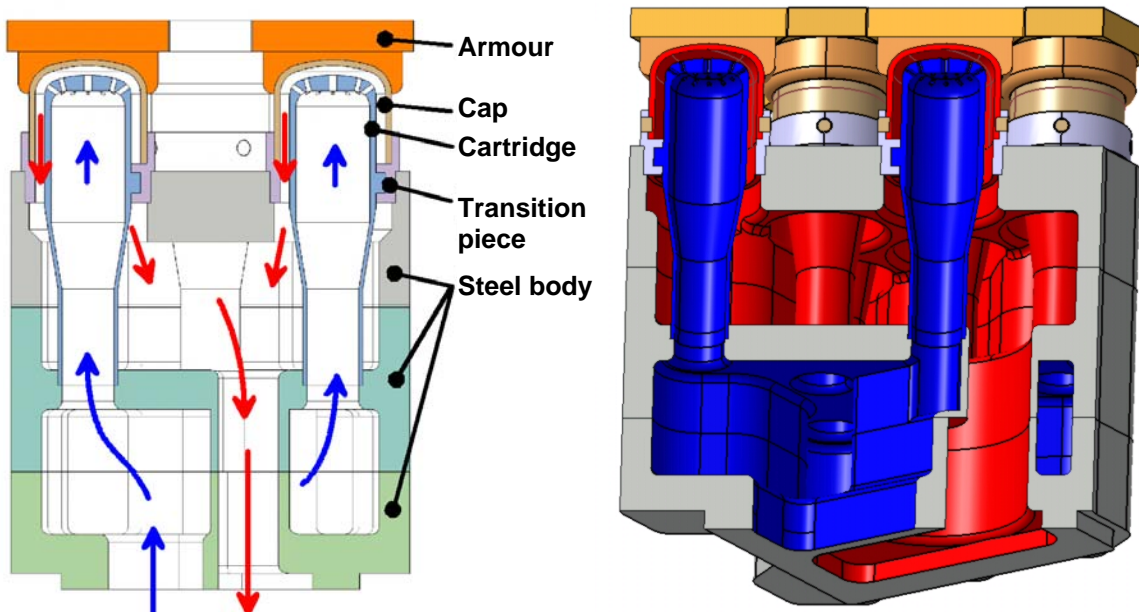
Cross section of the multiple cooling finger housing (left 2D, right 3D CAD).
